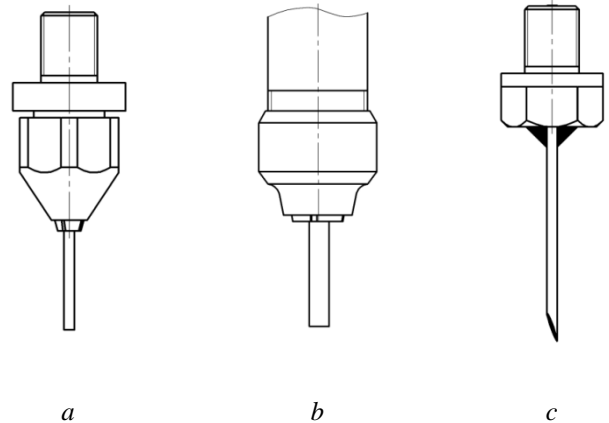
Passive working tools for specifically drilling equipped with collet holders
